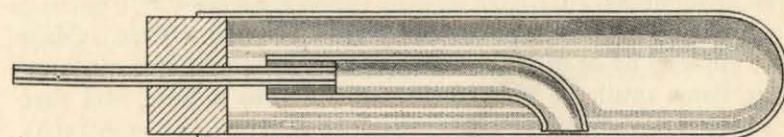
METHOD OF CONTROLLING THE INNER TUBE
